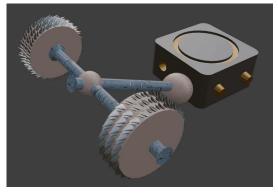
External Construction Robot[Xuhang Wan,Blender]
